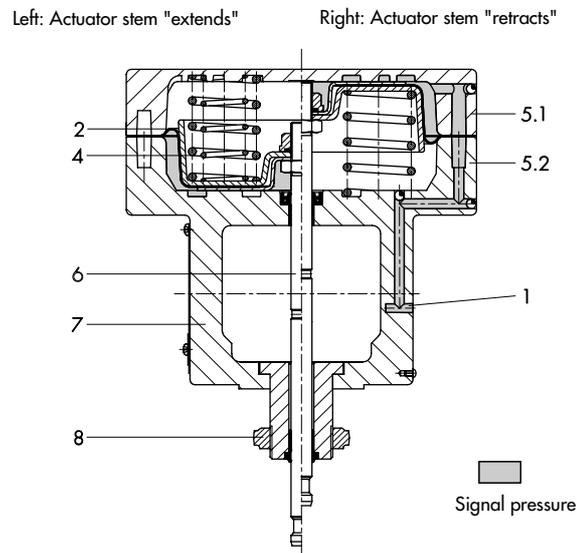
· Fire-Lock version; in fail-safe position (on right)
